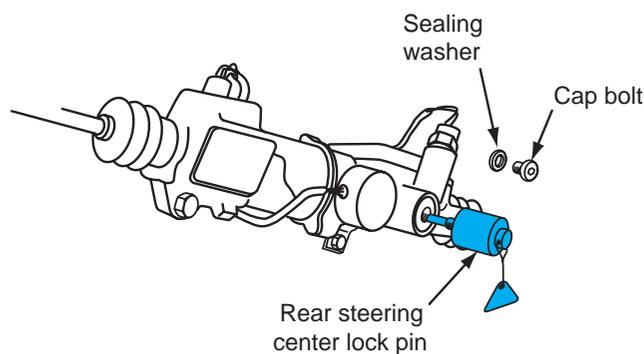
Removing the cap bolt and washer, and installing the rear steering center lock pin.
